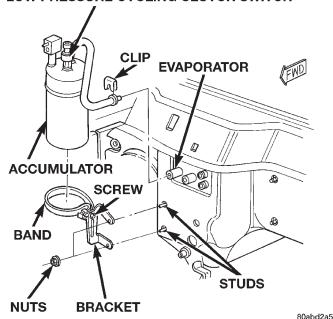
Accumulator Remove/Install - Left-Hand Drive
